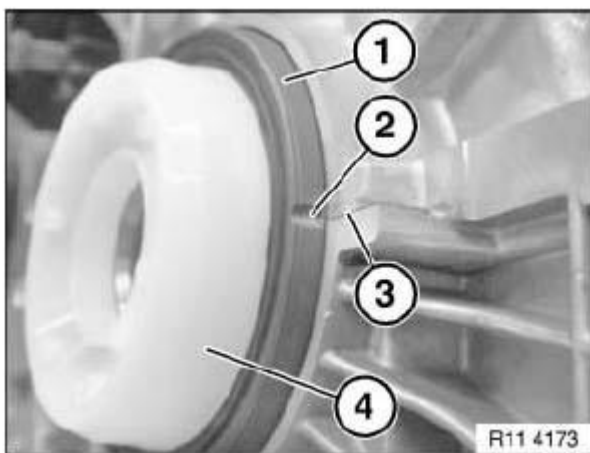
Identifying Support Sleeve, Radial Shaft Seal, Groove And Housing Partition
